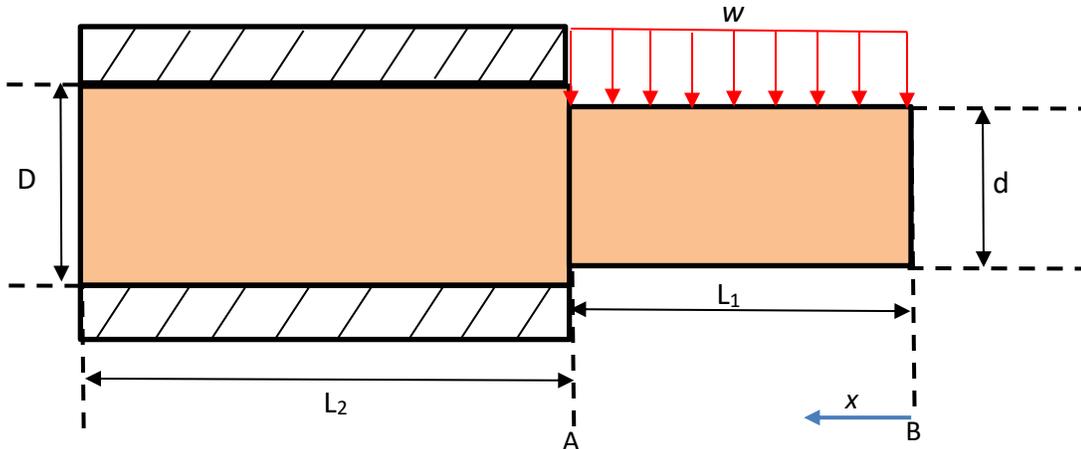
Idle End Shaft Stress Analysis with Distributed Load, w , from Welding Fixture Yoke
